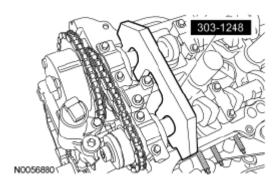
Aligning Timing Marks On VCT Assemblies Courtesy of FORD MOTOR CO.
